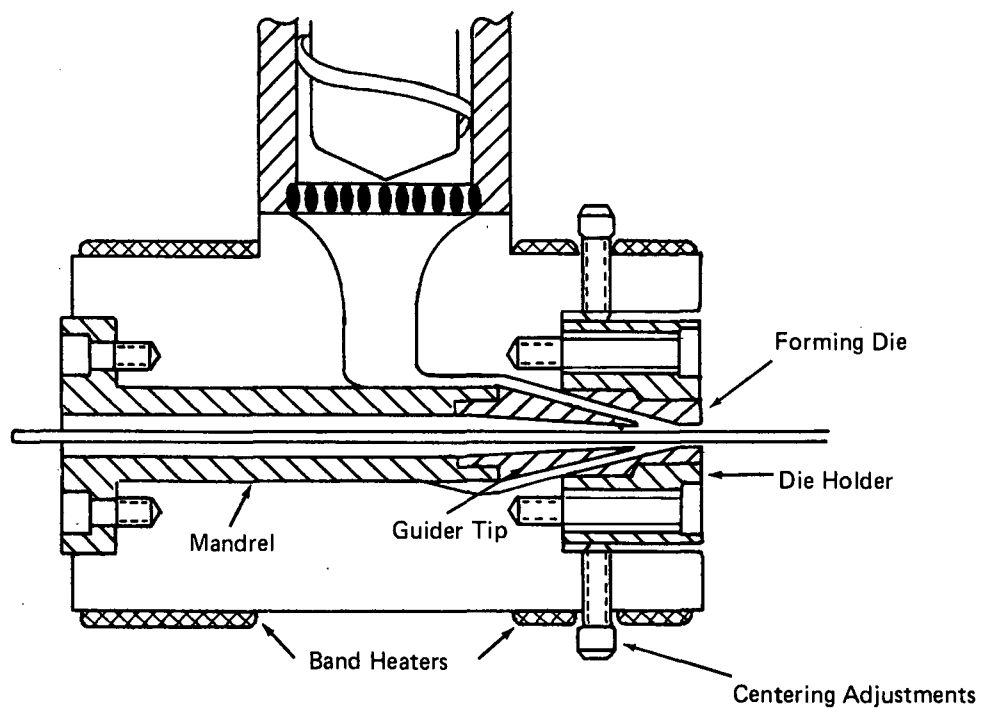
CROSSHEAD DIE FOR WIRE COATING
